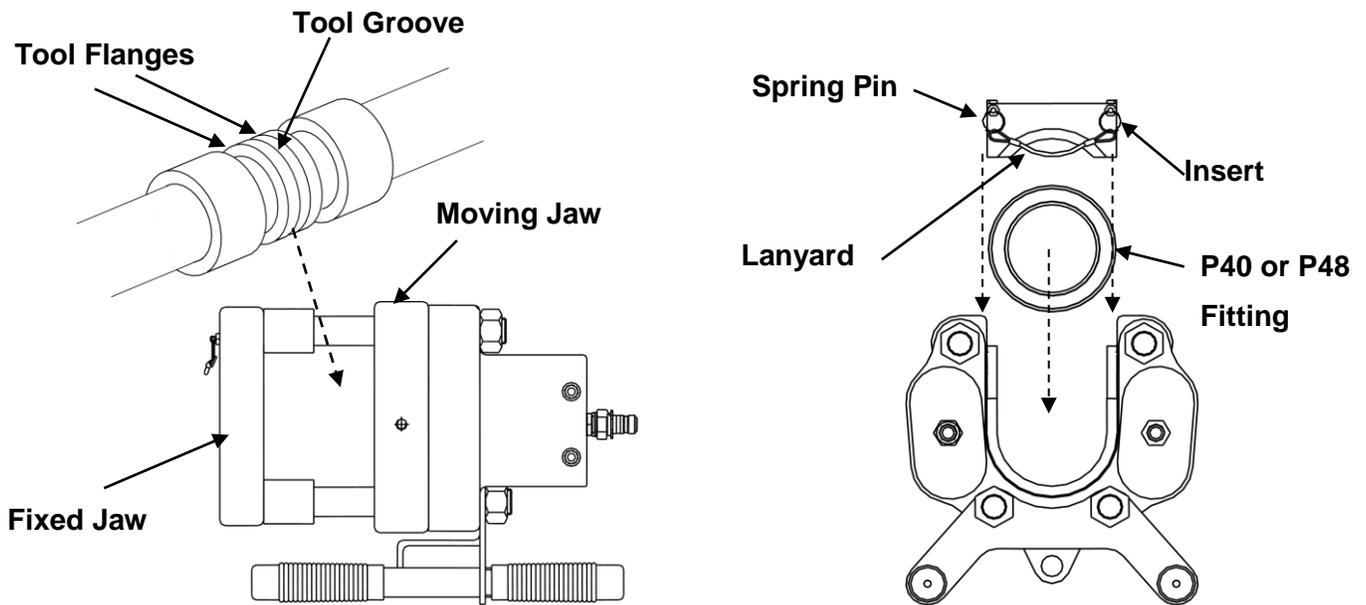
2 1/2- and 3-Inch Fitting Assembly
